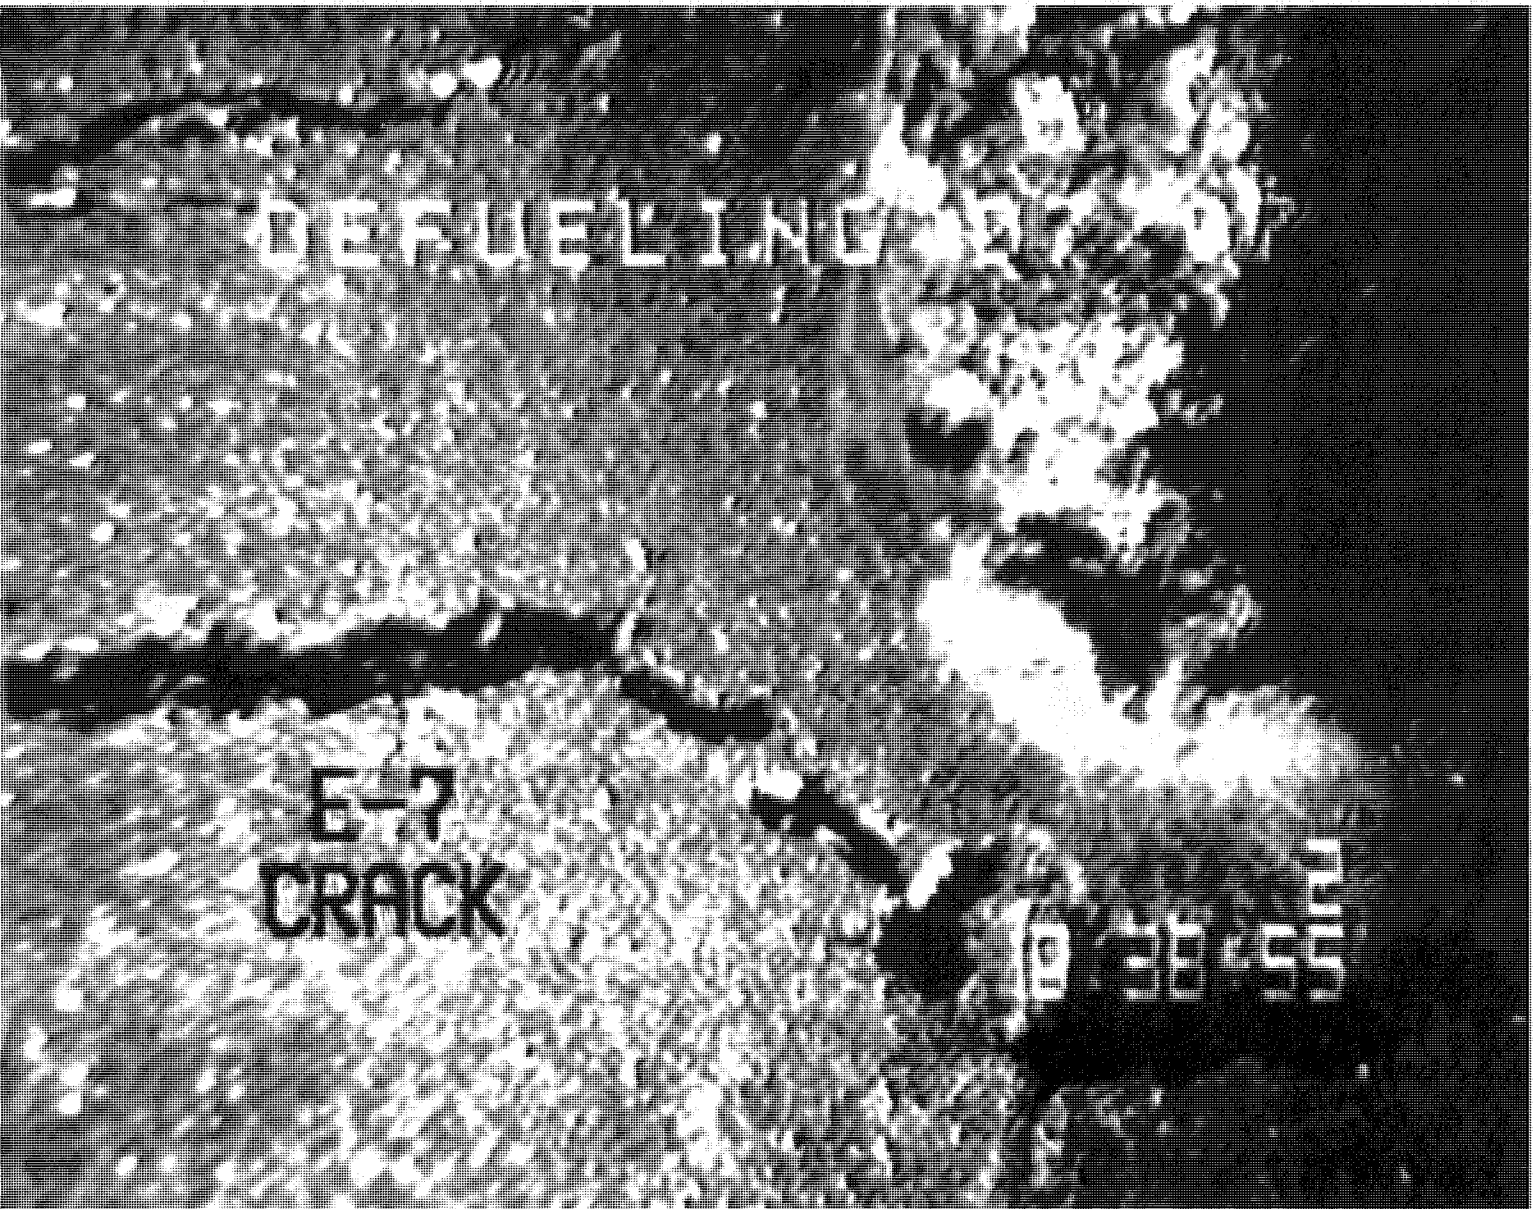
A Crack in the Lining of the Lower Head of Reactor Vessel Near Incore Nozzle E-7
